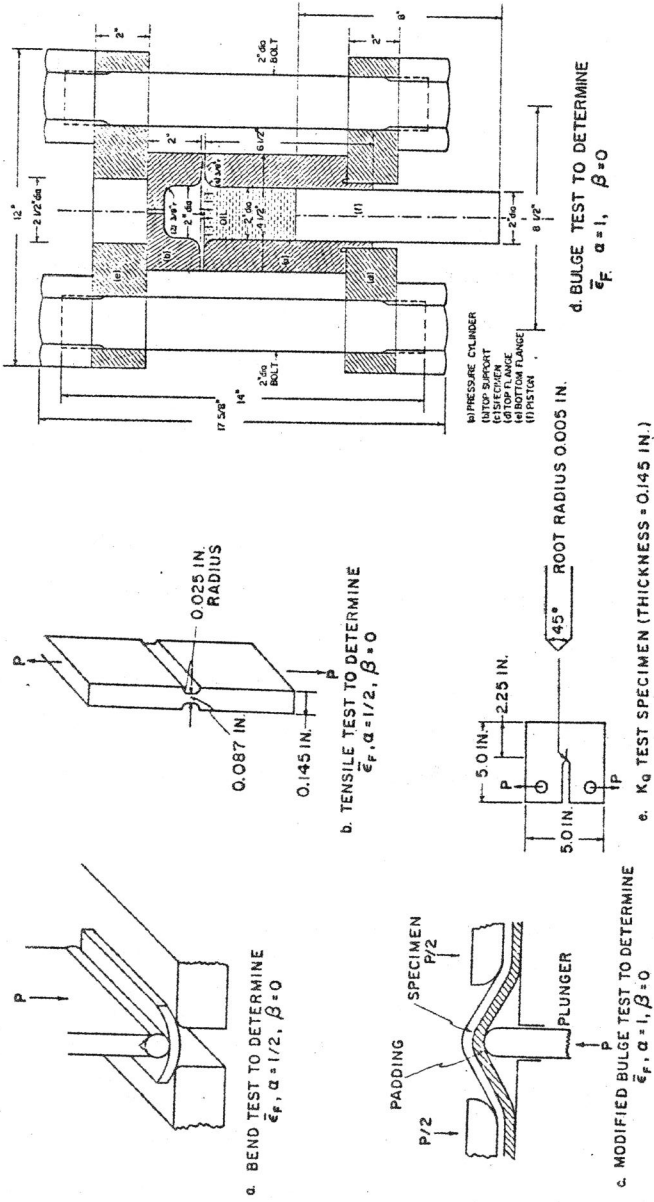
TEST SPECIMENS FOR BIAxIAL FRACTURE STRAIN AND FRACTURE TOUGHNESS MEASUREMENTS.
